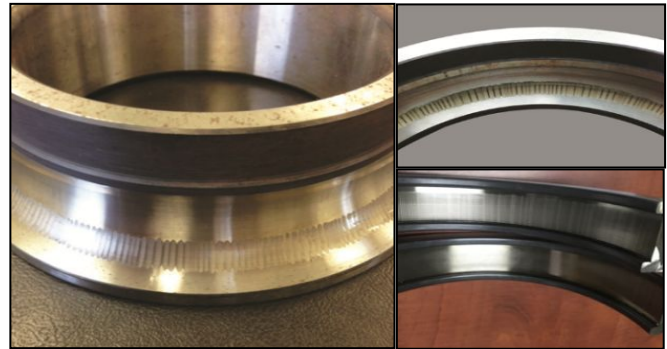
Examples of Bearing Failures on ASD Fed Motors
